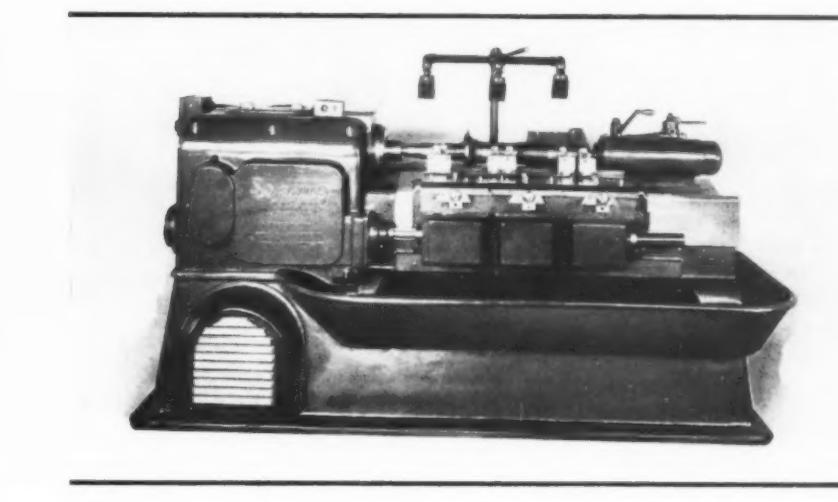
Lo-Swing Model U Automatic Lathe, Adapted for Turning Pistons, Bushings, Stem Pinions, Steering Knuckles, and Similar Work
